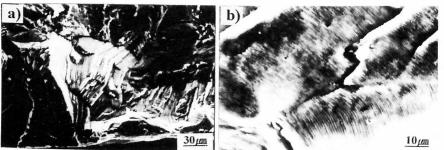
Fatigue fracture surface of Al-5.5Mg alloy at the maximum stress of 164MPa, 4.35x10<sup>6</sup> cycles; a) crack initiation area b) striations
